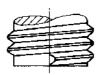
BLUNT START AT END OF THREAD ON GAUGE
